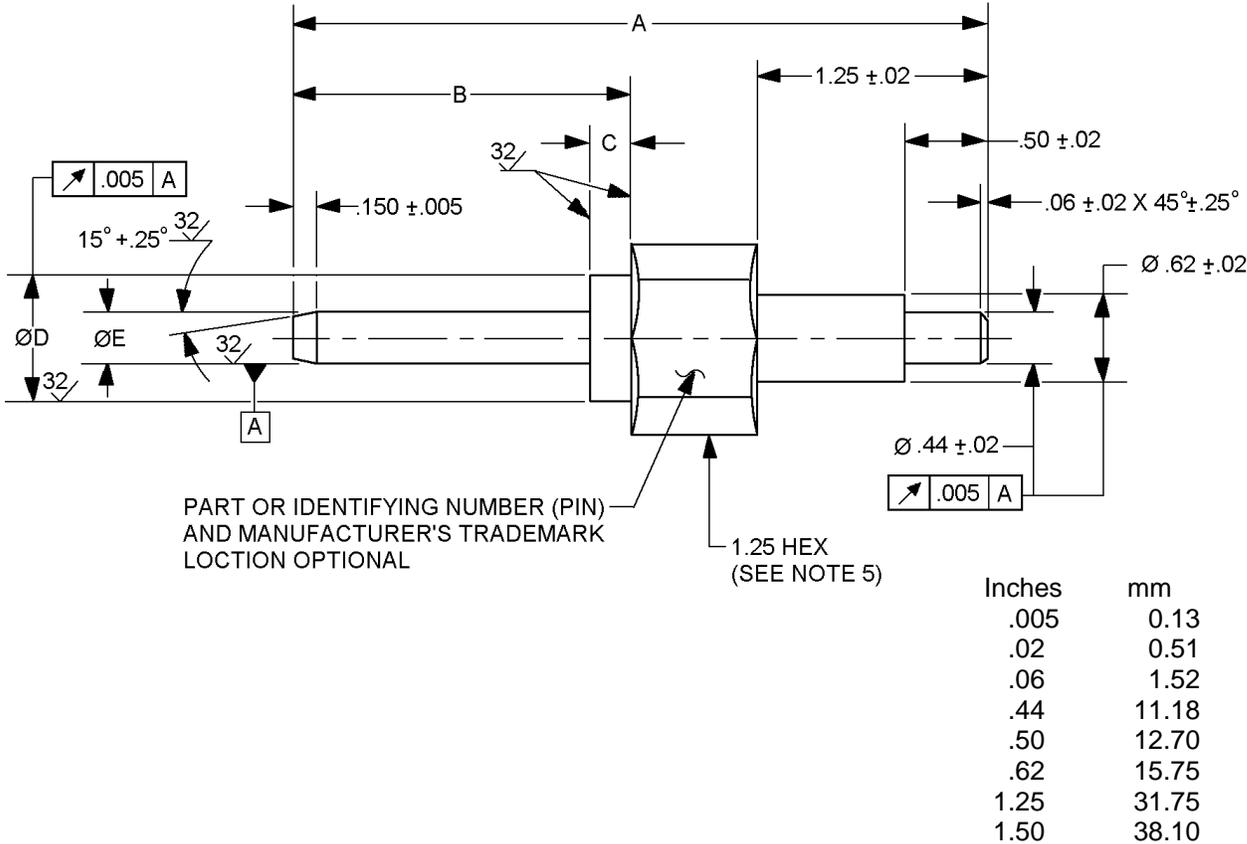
Mandrel sleeve setting dimensions and configuration.
